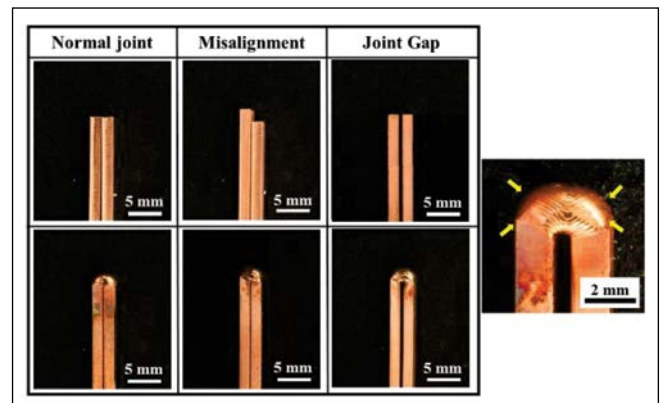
Joining results of rectangular copper wire with the PJT welding process.
